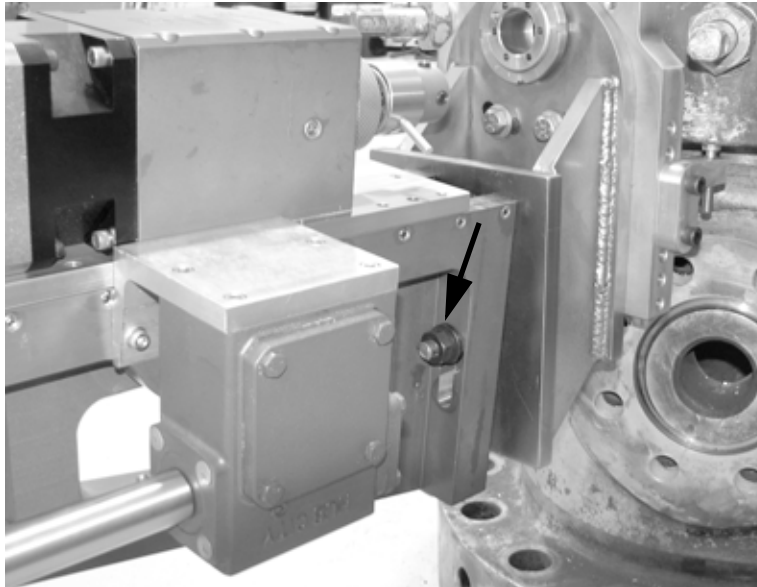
Mount the slide by inserting the mounting bolt nuts through the holes in the base of the slide.
